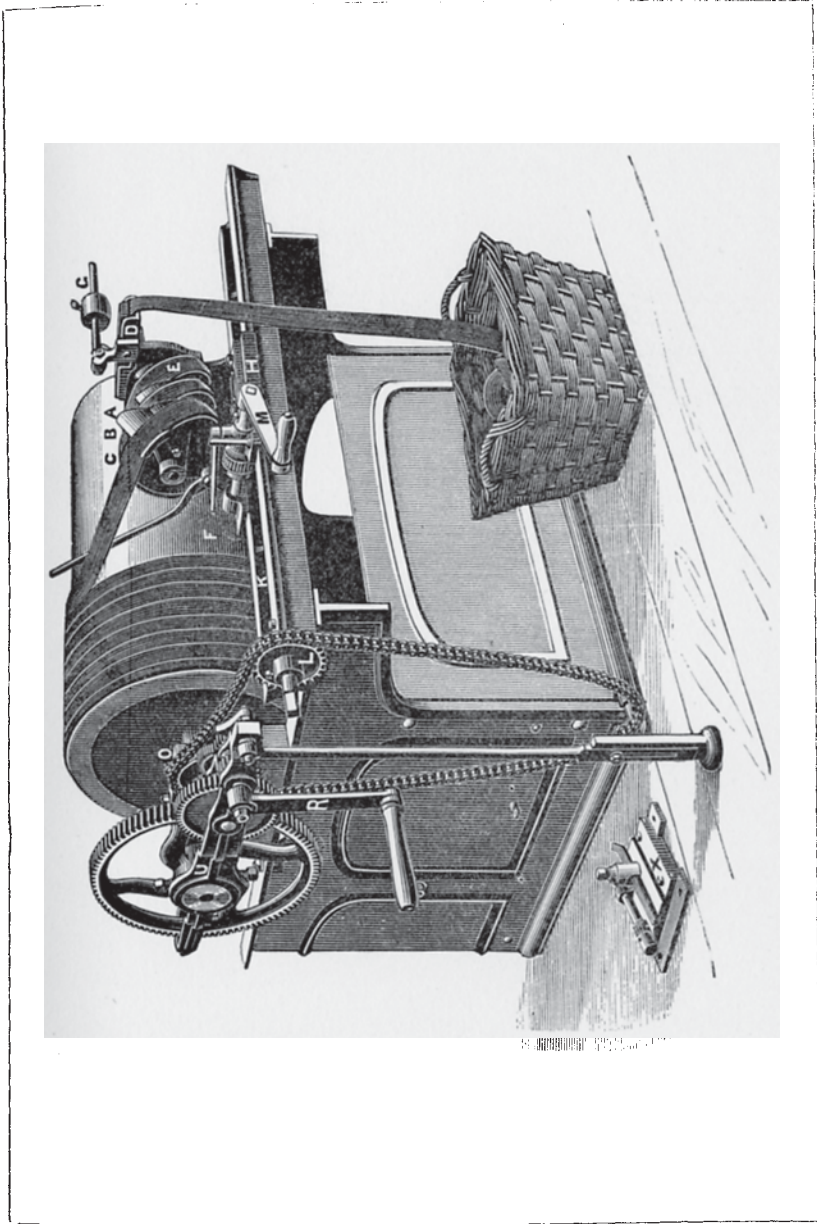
DRONSFIELD'S PATENT CARD MOUNTING MACHINE.
